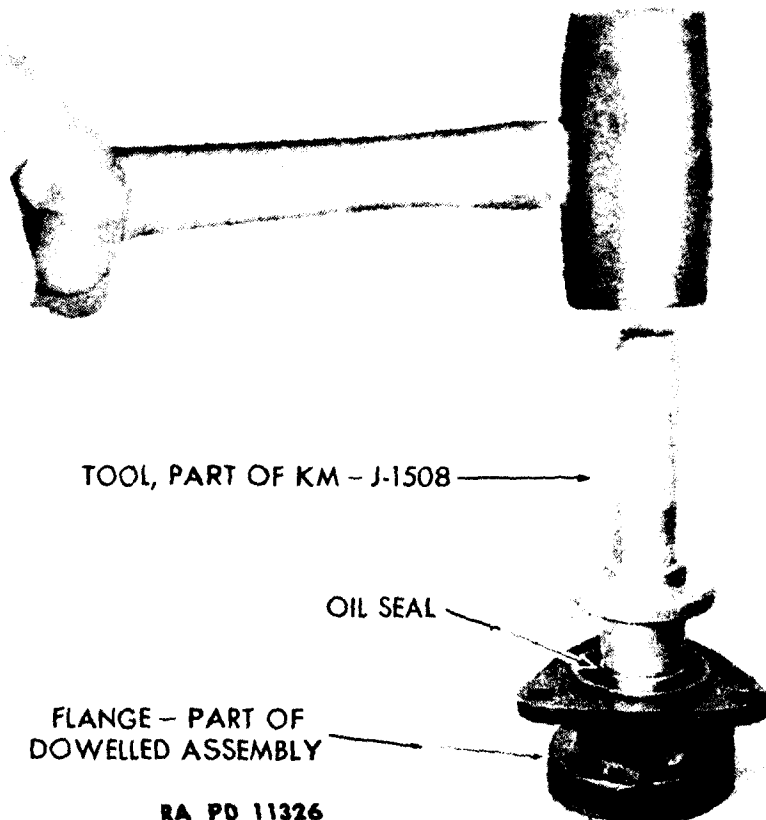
Driving Inner Oil Seal into Fuel Pump Flange
